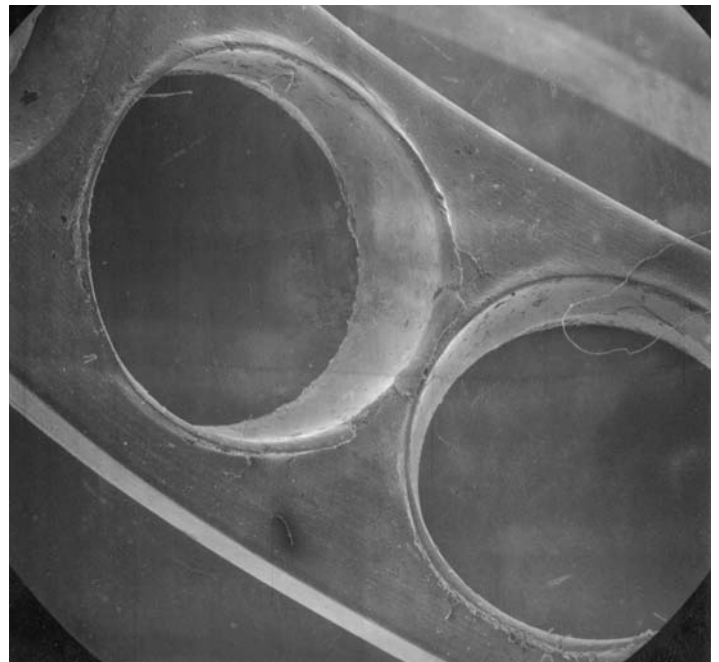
Wear and deformation of the cage of the inner bearing
